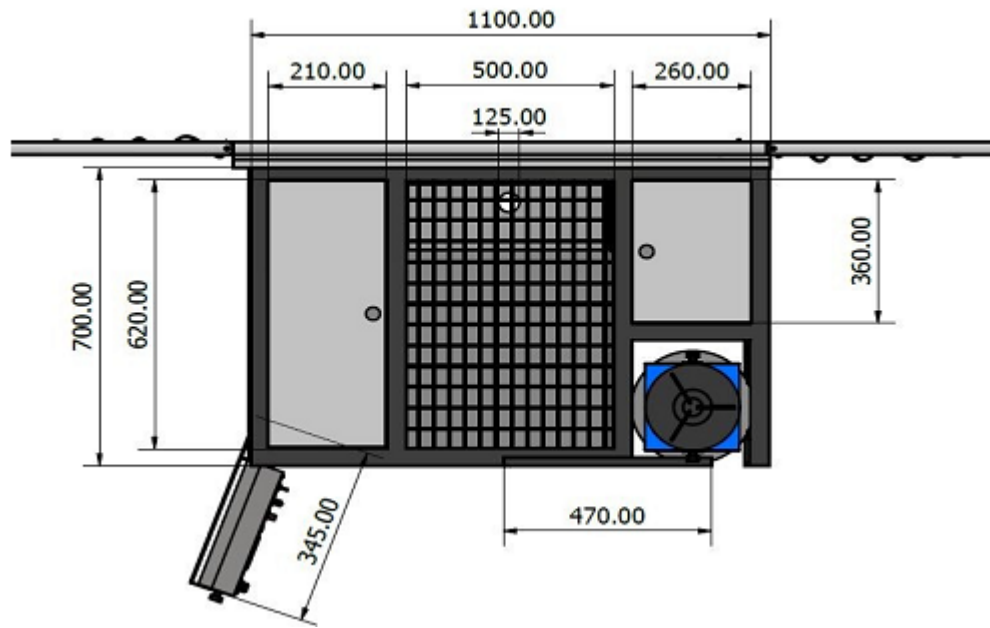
Basic dimensions of the welding table (top view)
